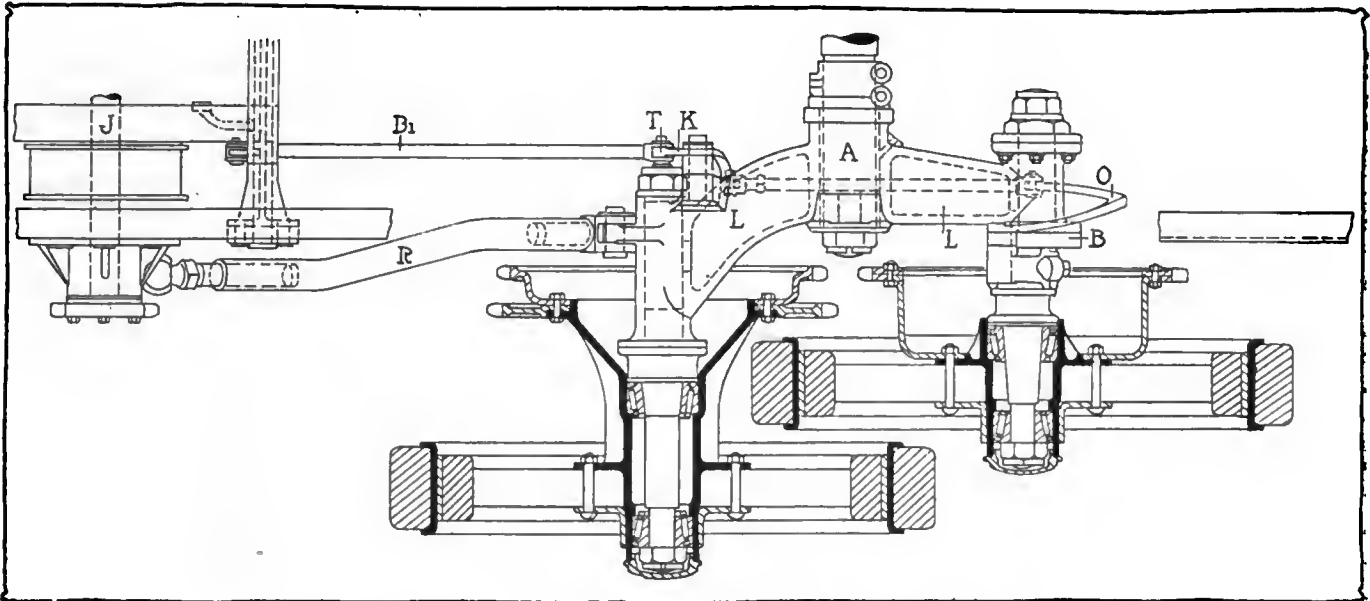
Plan view of Dow dual wheel mounted on the rear end of a 5-ton Mack truck
